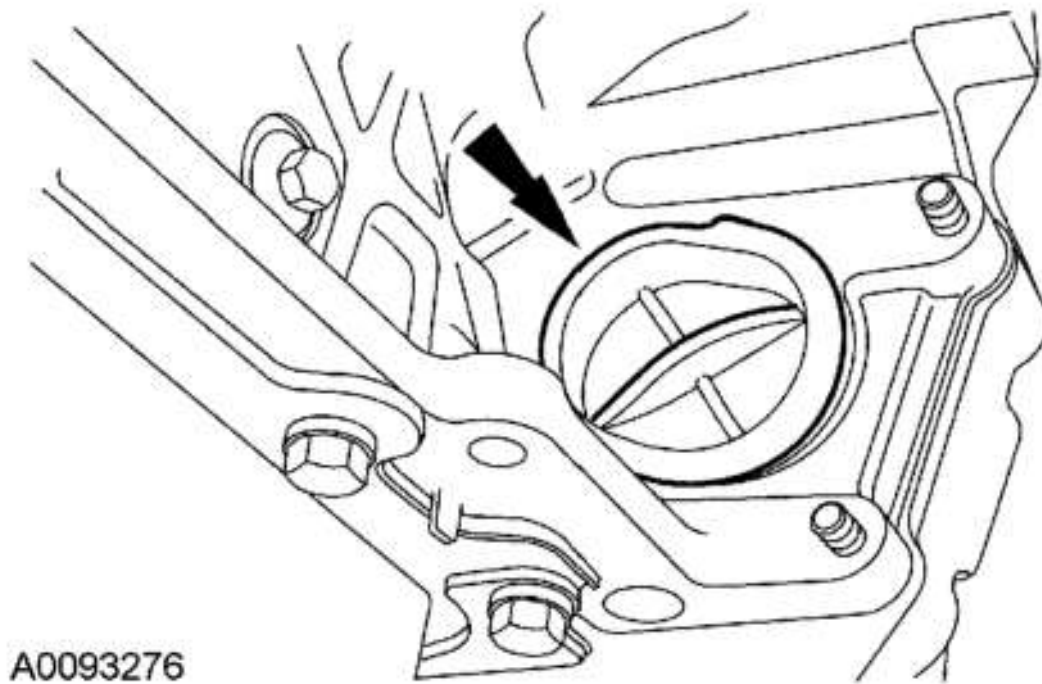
Removing Rubber Torque Converter Nut Access Plug
